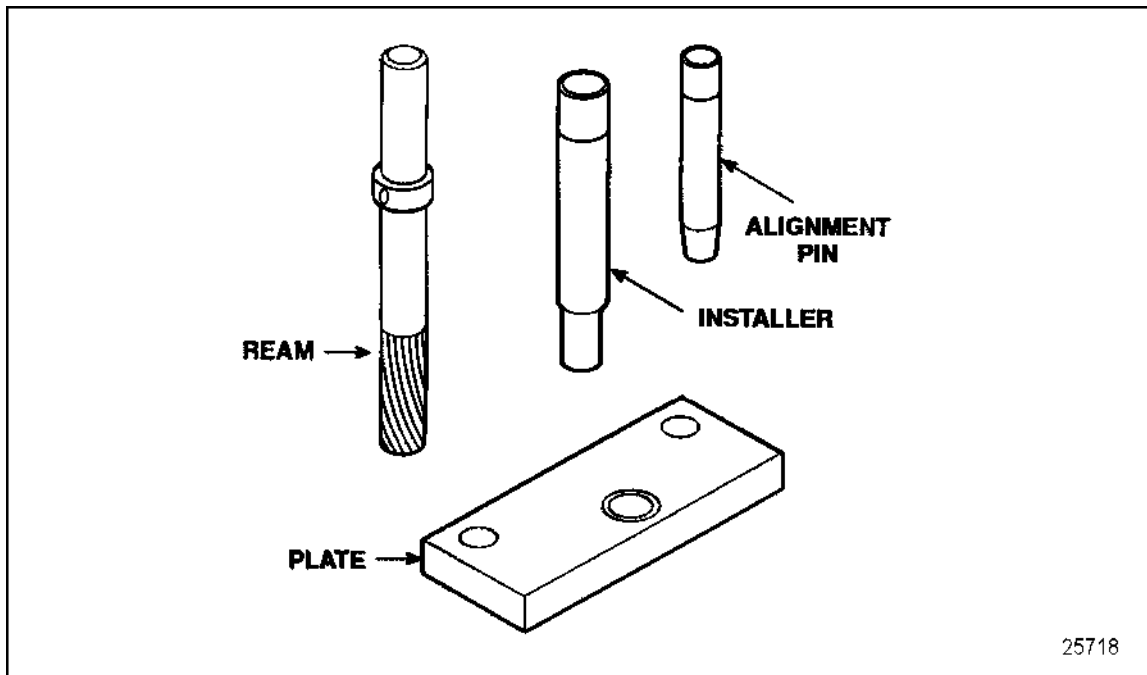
Head Modification Kit (Bolt Hole SL),J 41169
